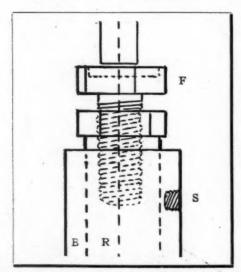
Upper part of valve pushrod showing manner of adjustment
